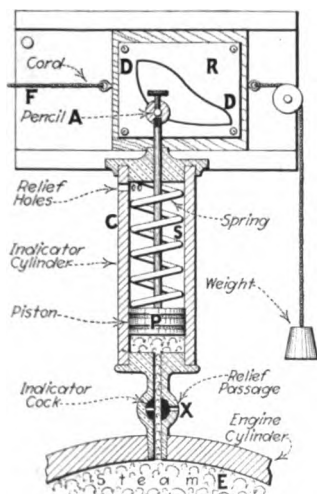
Sectional diagrammatic view of Watt's steam-engine indicator.
